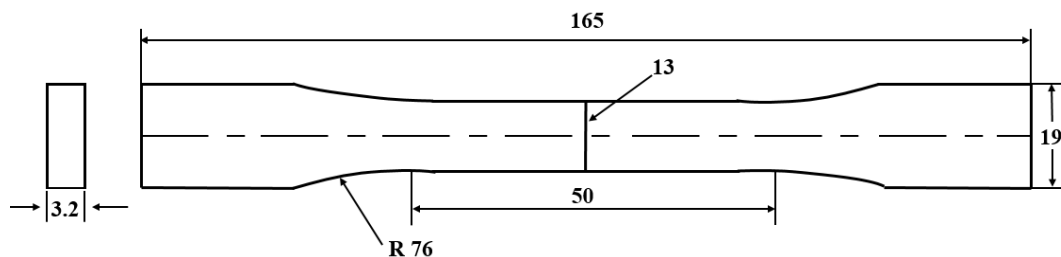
Dog-bone specimen geometry and dimensions for uniaxial tensile tests according to ASTM D638-14, Type I standard (dimensions in mm) [25].
